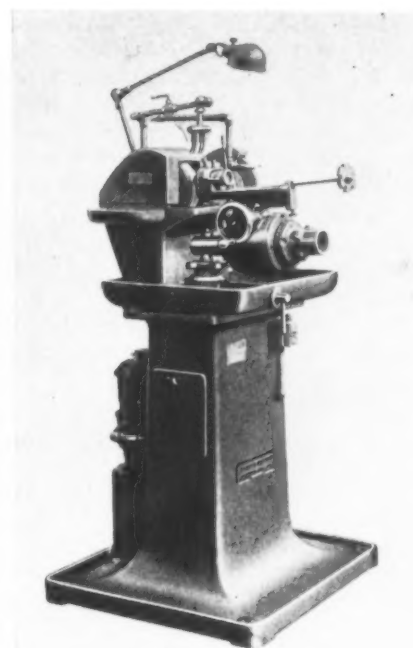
Pratt & Whitney Deep-hole Drill Sharpening Machine
